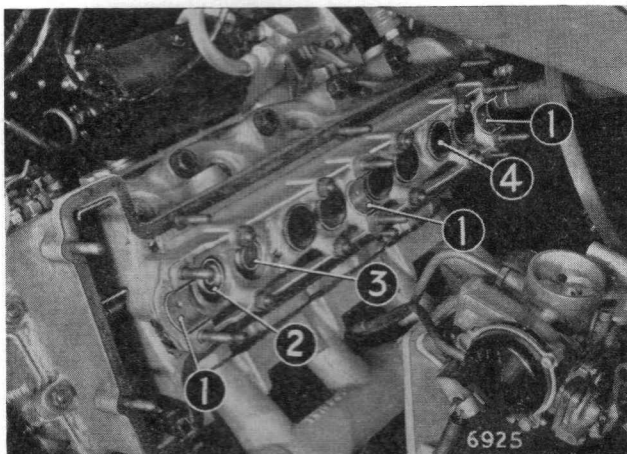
Position taken by timing chain after removing camshaft sprocket
